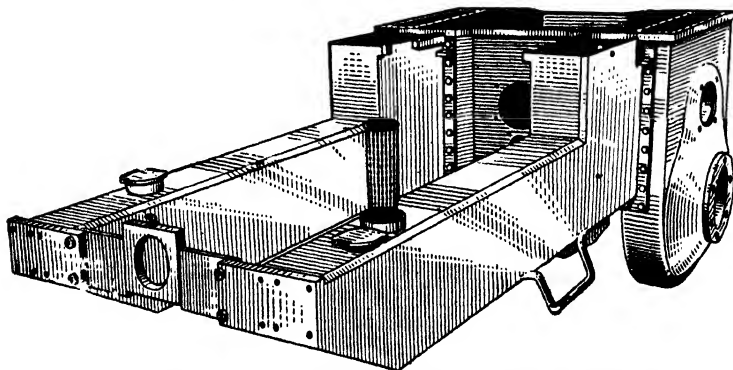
The original welded tractor transmission case with its "bolted-on" welded fuel tanks and motor hanger. (*Courtesy of R. G. LeTourneau, Inc.*)
